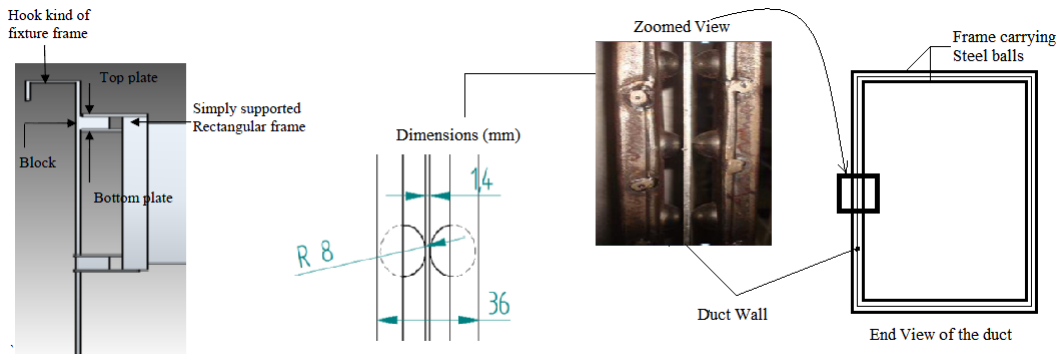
Detailed view of Simply supported condition and fixture assembly, Ref.[11]
